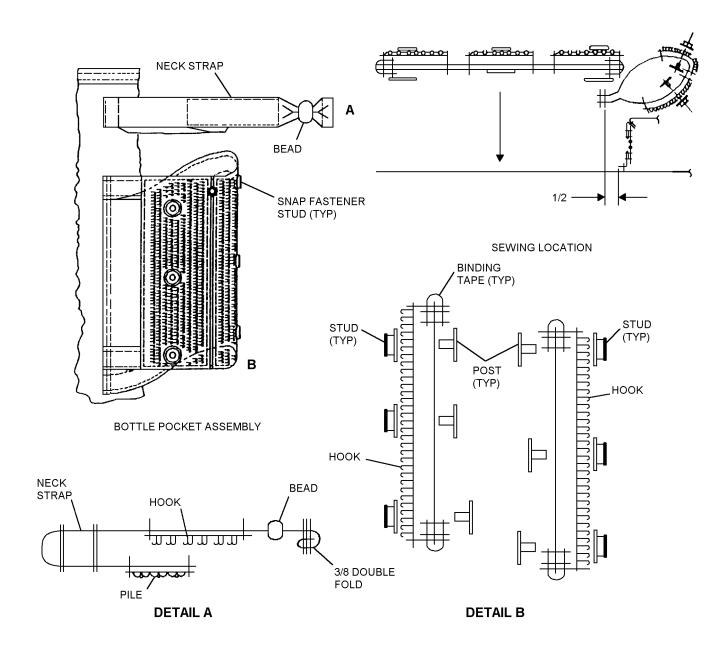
Fabrication of SRU-40/P HABD Bottle Pocket Assembly
